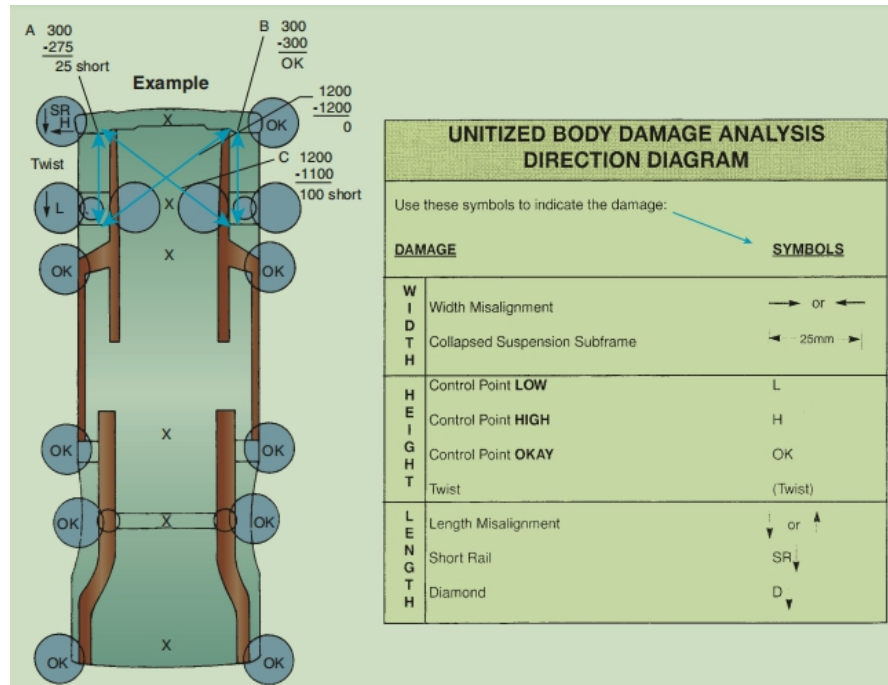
A printout or simple drawing of the dimension diagram will also help you evaluate frame or body damage. Subtract your measurement from its specification to calculate the amount of damage in inches or millimeters. You can then draw arrows to show the direction of damage. On the drawing, abbreviate which damaged areas are high, low, right, left, twisted, diamond, sagging, and so on. This will help you visualize what must be done to pull or straighten the vehicle unibody or frame.
